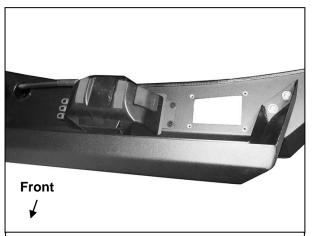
Attach Relocation Bracket to winch control unit. Attach assembly to top of Bumper
